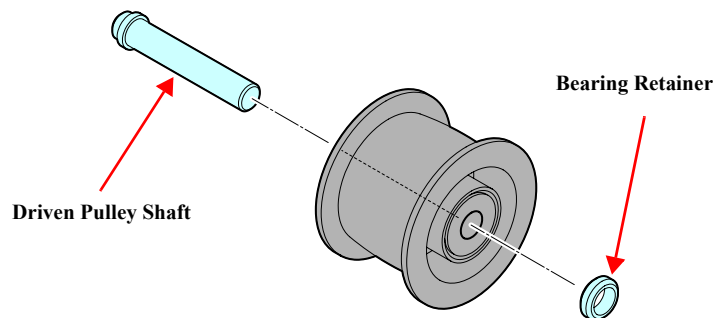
Reassembling the CR DRIVE PULLEY ASSY.
